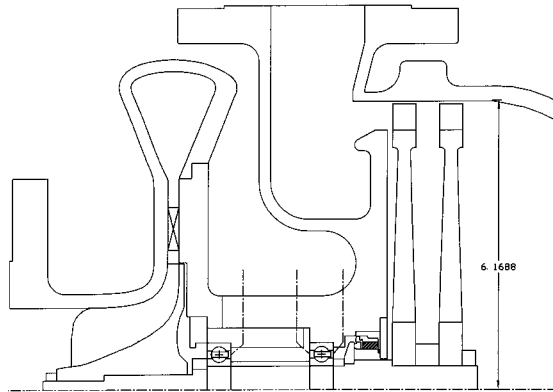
Conceptual LOX pump layout (subject to detail revisions).
